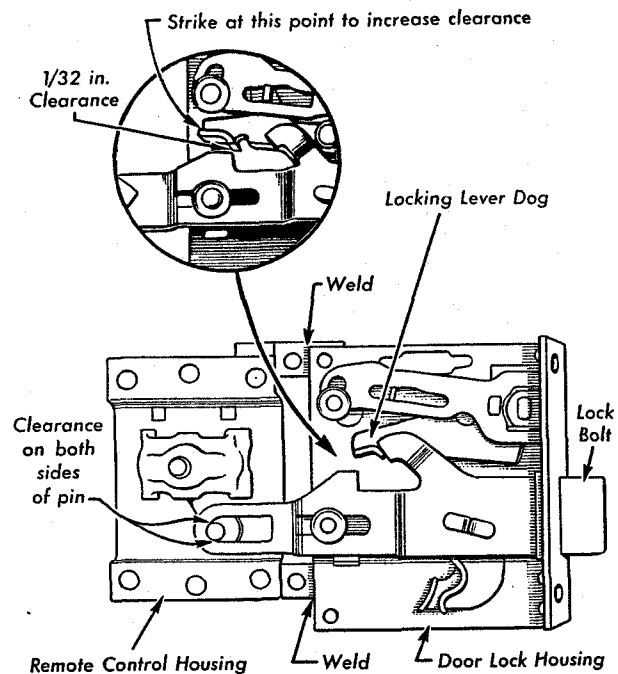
Drawing of door lock. Proper clearances are necessary at the points indicated to prevent sticking of the lock bolt
